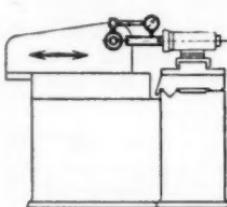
Main spindle in swivel headstock of universal grinder against adjusting movement of grindstone.
